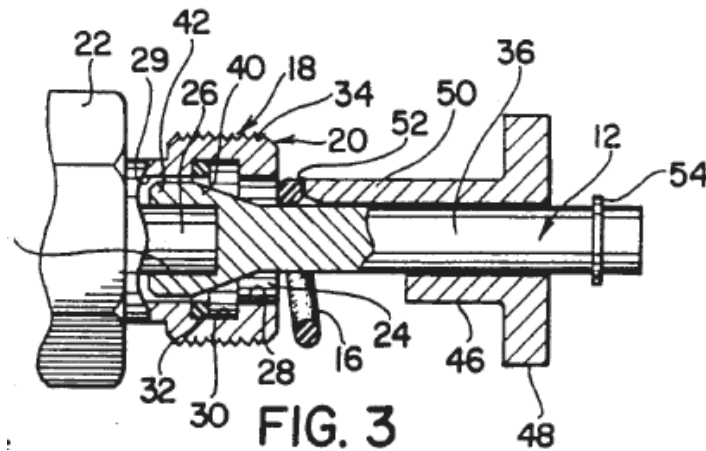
Tool inserted into electrical connector, and installing a seal.
